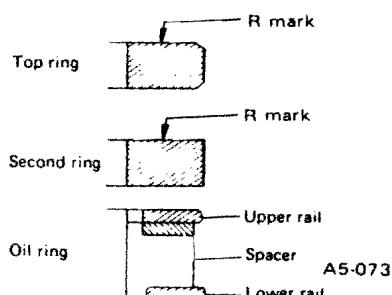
Cross section of piston rings (Riken Piston Ring)
